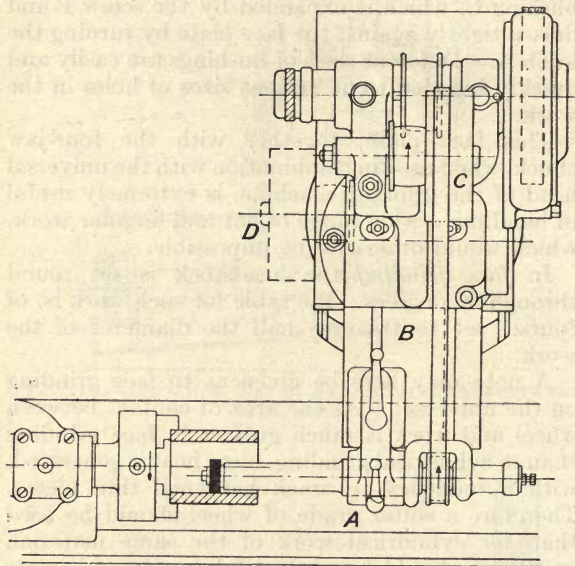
INTERNAL SPINDLE DRIVE : CHURCHILL
